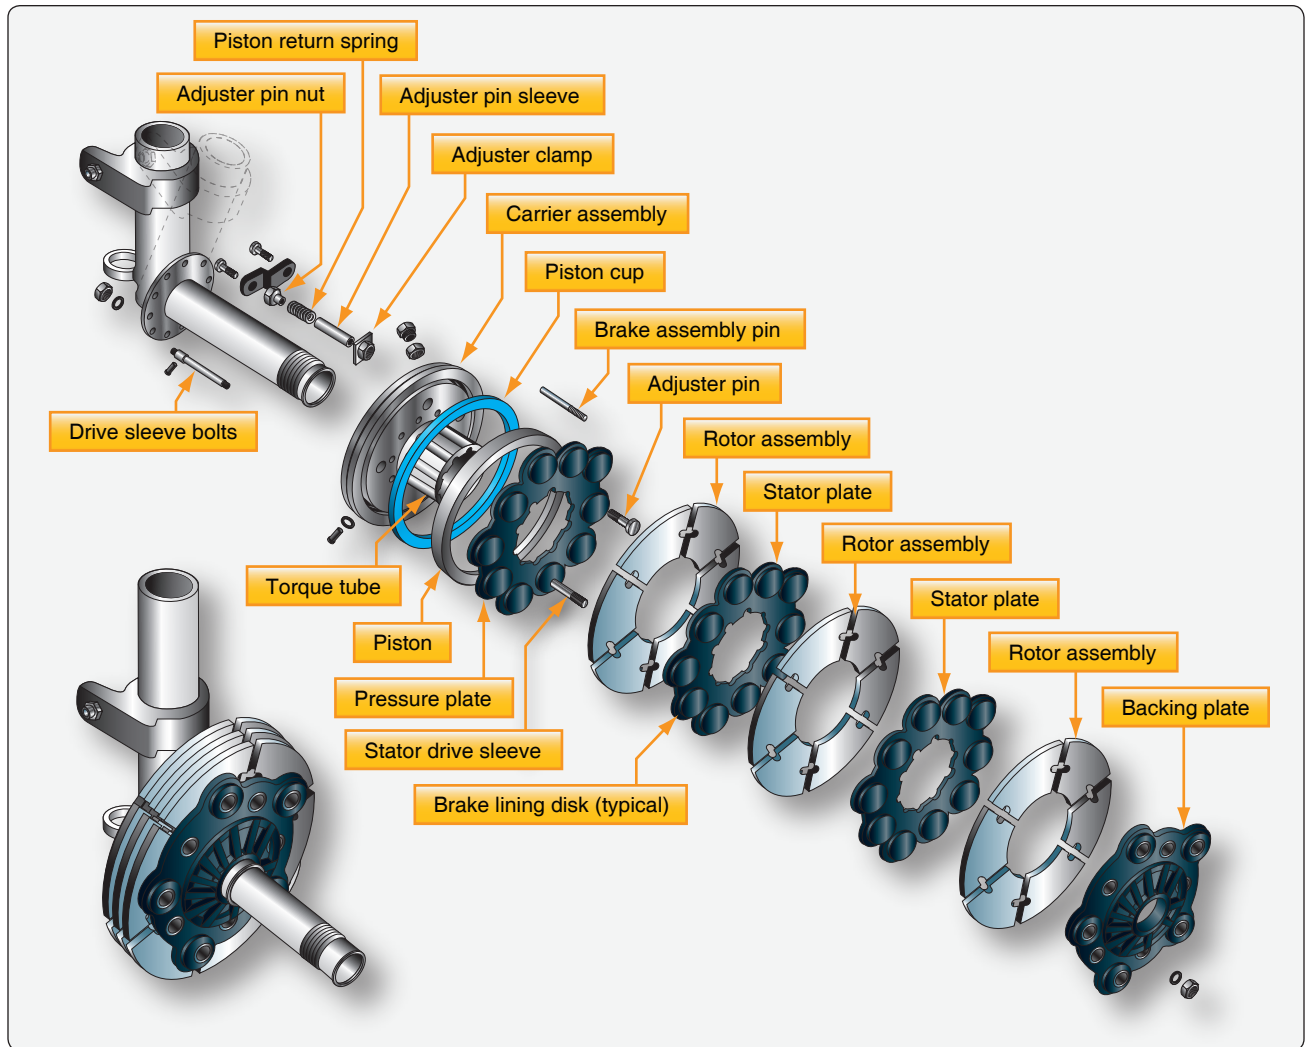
Exploded and detail views of segmented rotor brakes.
